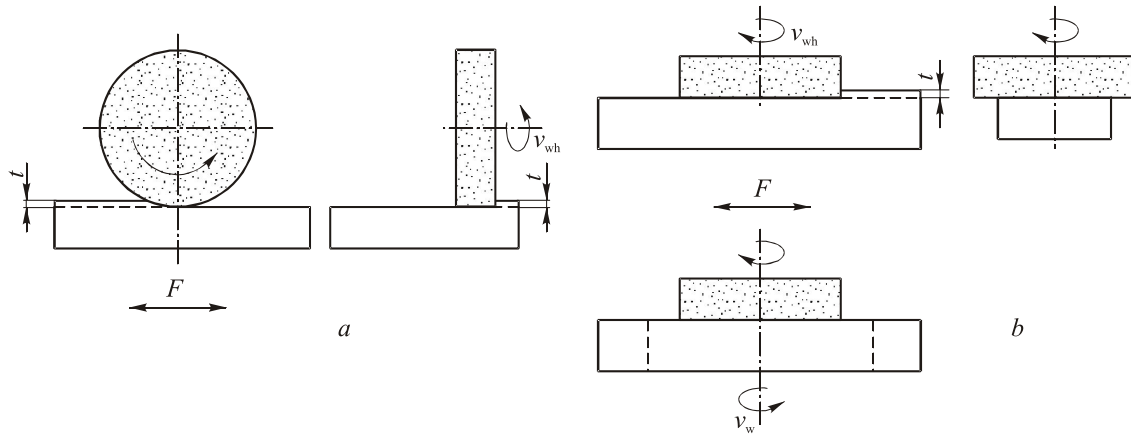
Surface grinding: (a) by wheel periphery; (b) by wheel face
